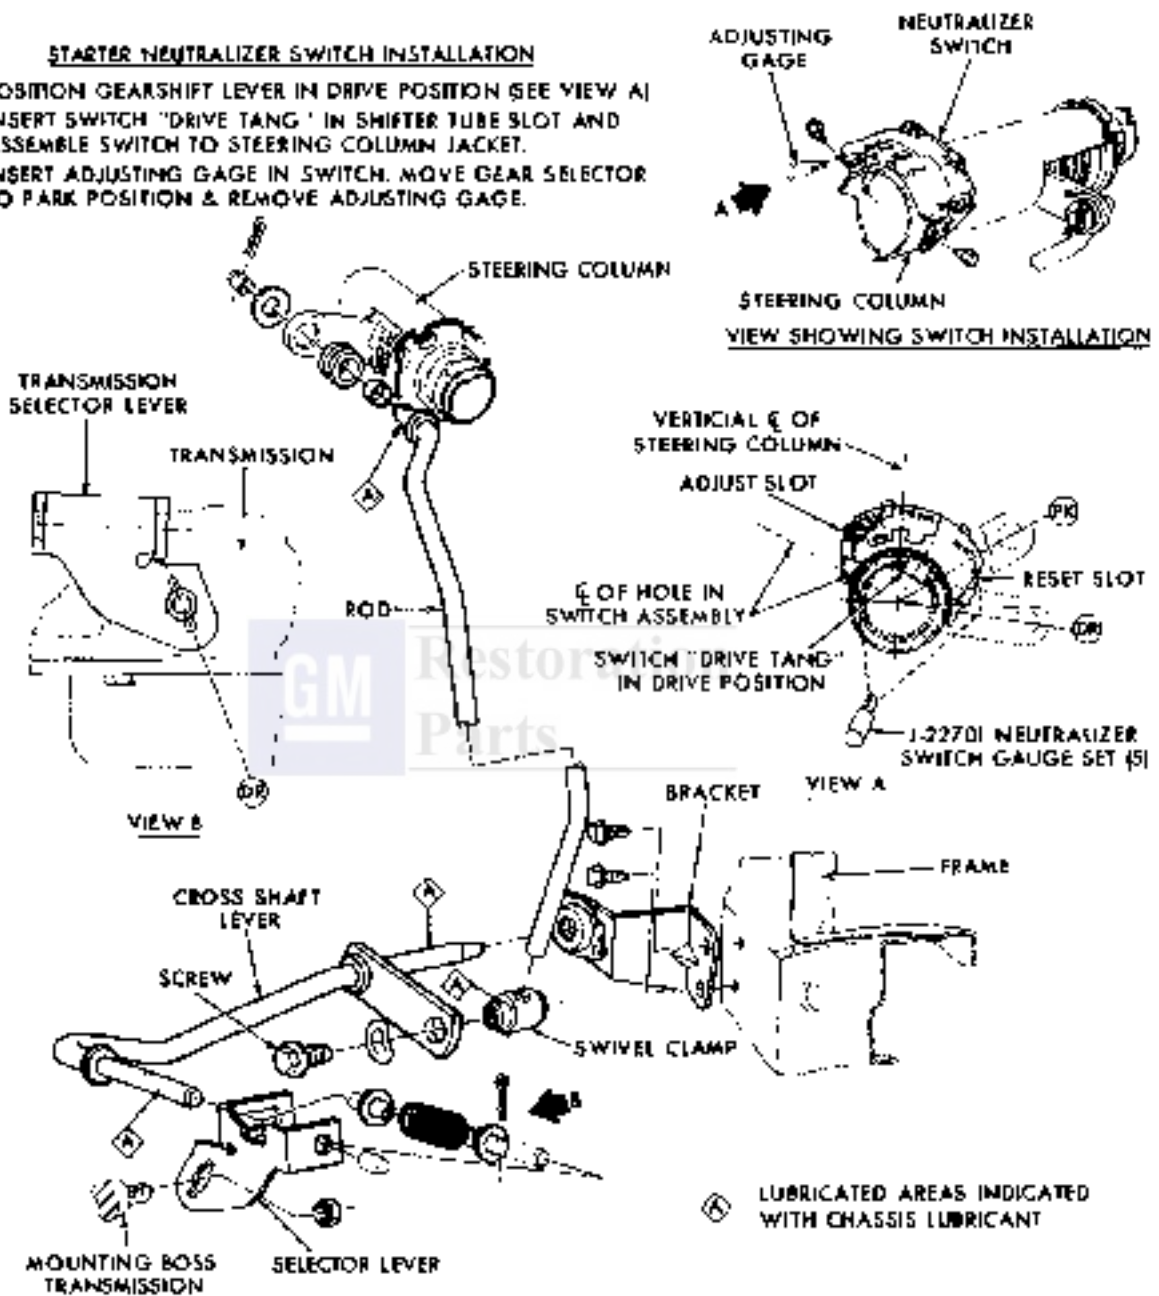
E-3 Gearshift Controls (Column) - Pontiac
